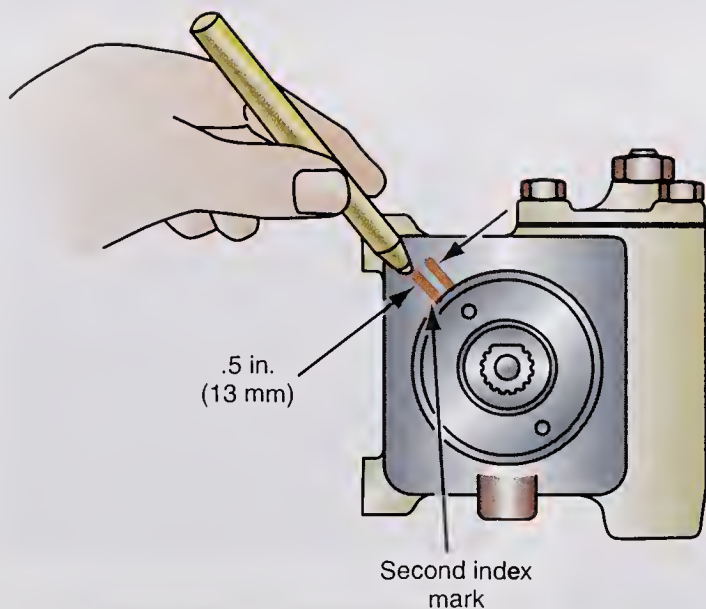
Measuring 0.50 in. (13 mm) counterclockwise from the index mark on the steering gear housing.
